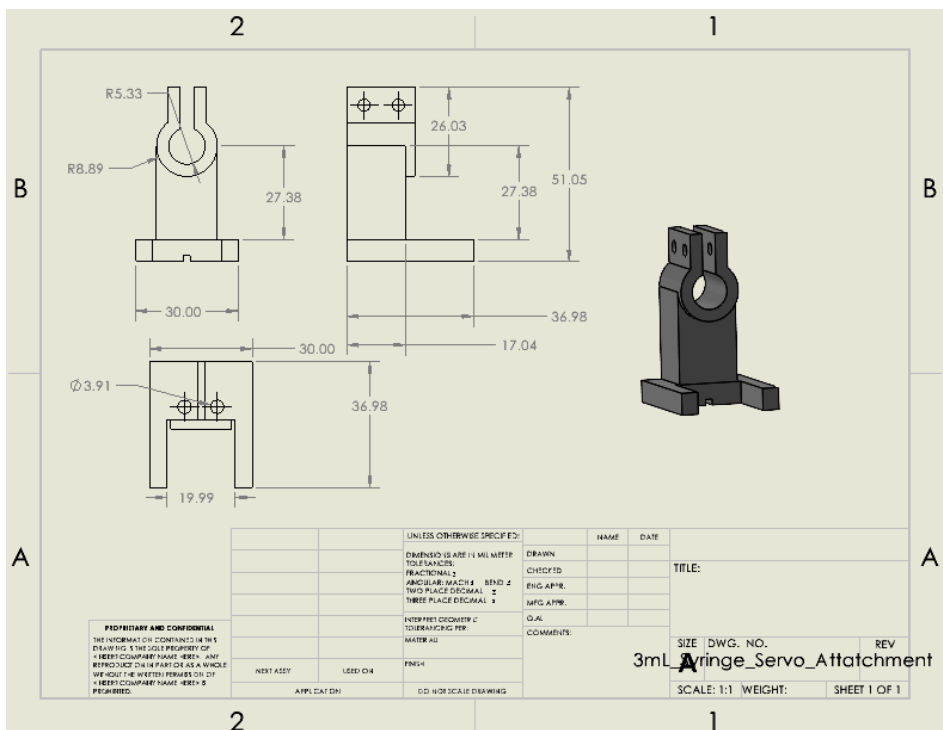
3mL Syringe Servo Attachment CAD Drawing
